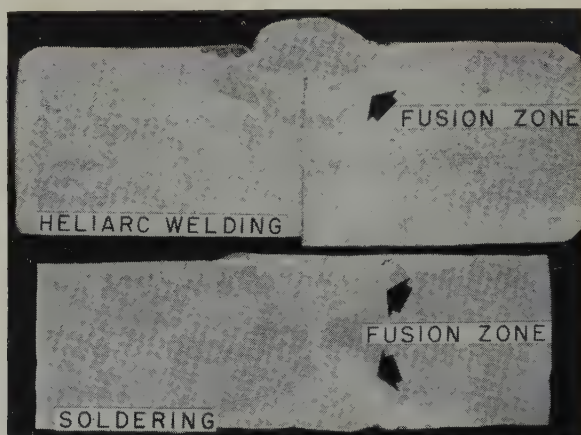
Cross section of lead-0.69 wt % lithium alloy joined by heliarc welding and soldering. (2 ×)
